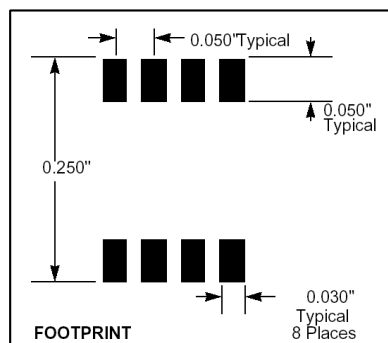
Footprint of IP Lock device (all dimensions are in inch unit)
